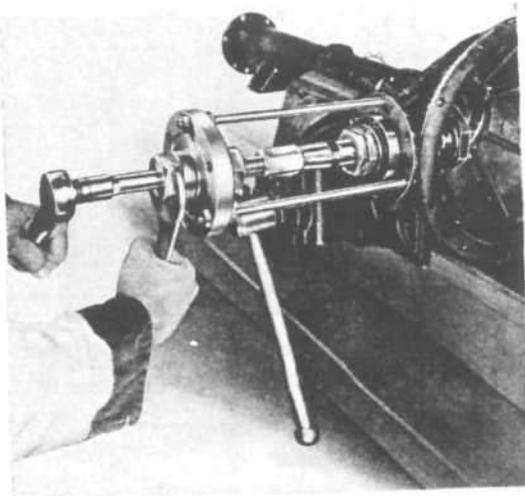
PINION AND BEARING REMOVER AND REPLACER
